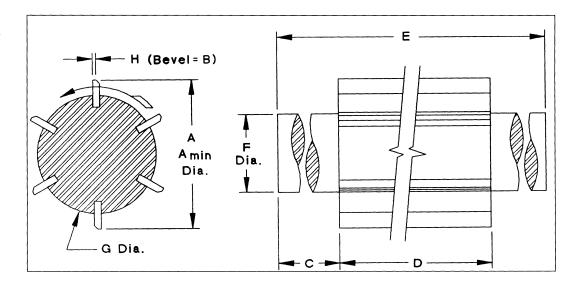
Sectional view of a roller in a roller gin stand (see table 10–1 for dimensions). *O.D.*, Outside diameter.
